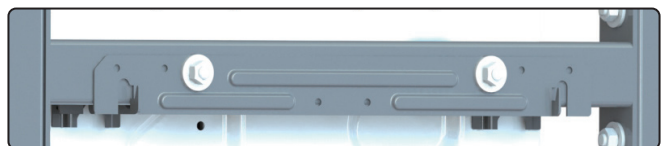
Secured Top Mounting Bracket for Back to Back Appliance Mounting
